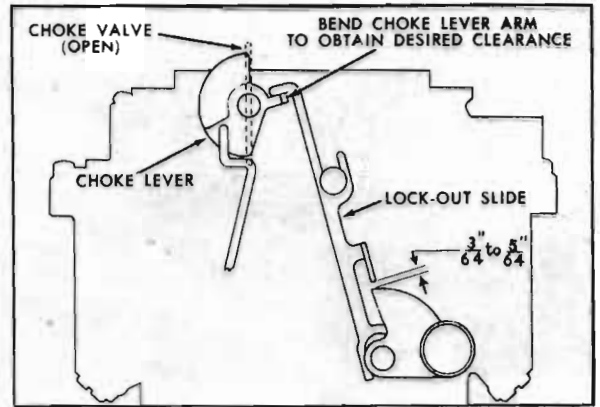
Lock-Out Slide Clearance with Choke Valve Open
